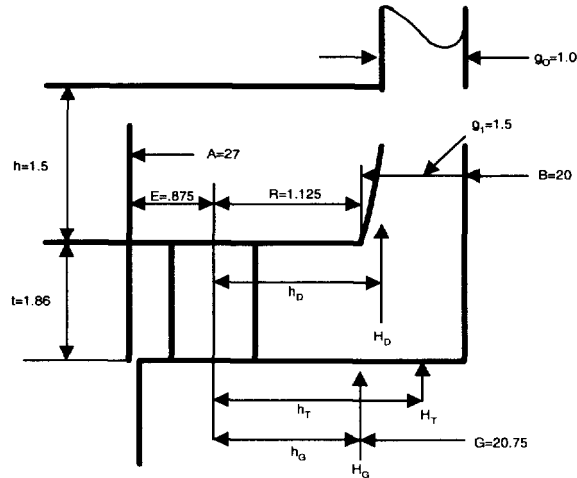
(18-7/8 in. Ø Bolts) Cover Plate Design
